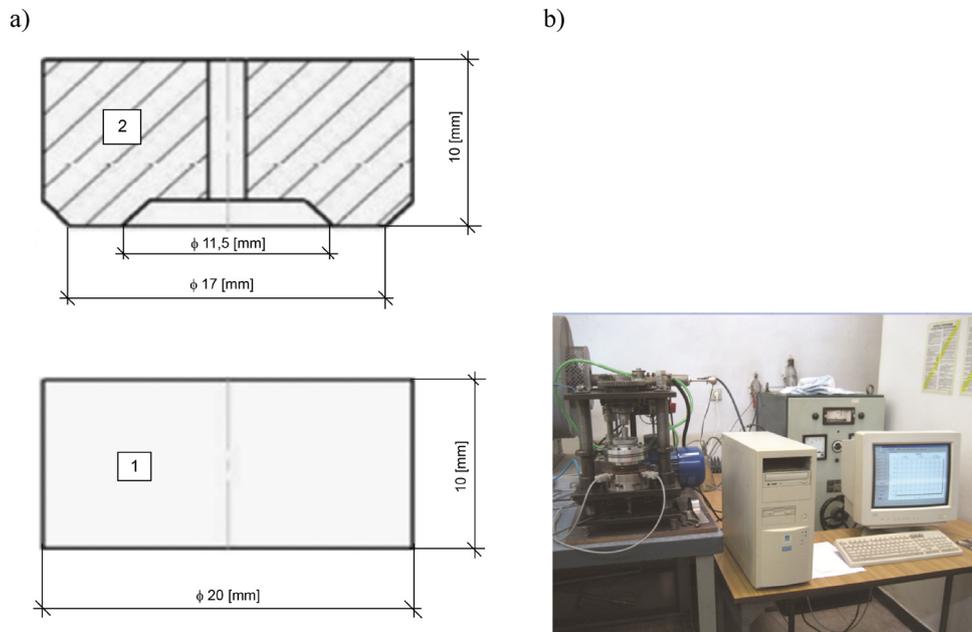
The ring/shield friction simulator: a) Friction pair: 1- Sample, 2- Counter sample; b) View of the test stand.
